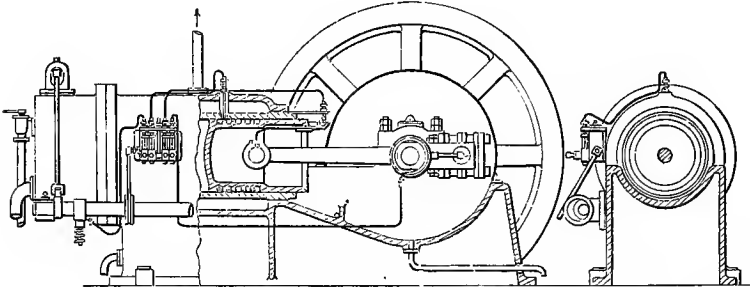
Timed oil injection to piston of gas engine by a mechanical lubricator
